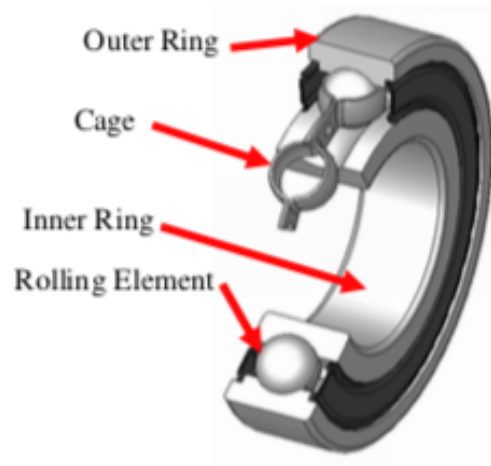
Geometrical representation of a ball bearing (Figure taken from [32])
